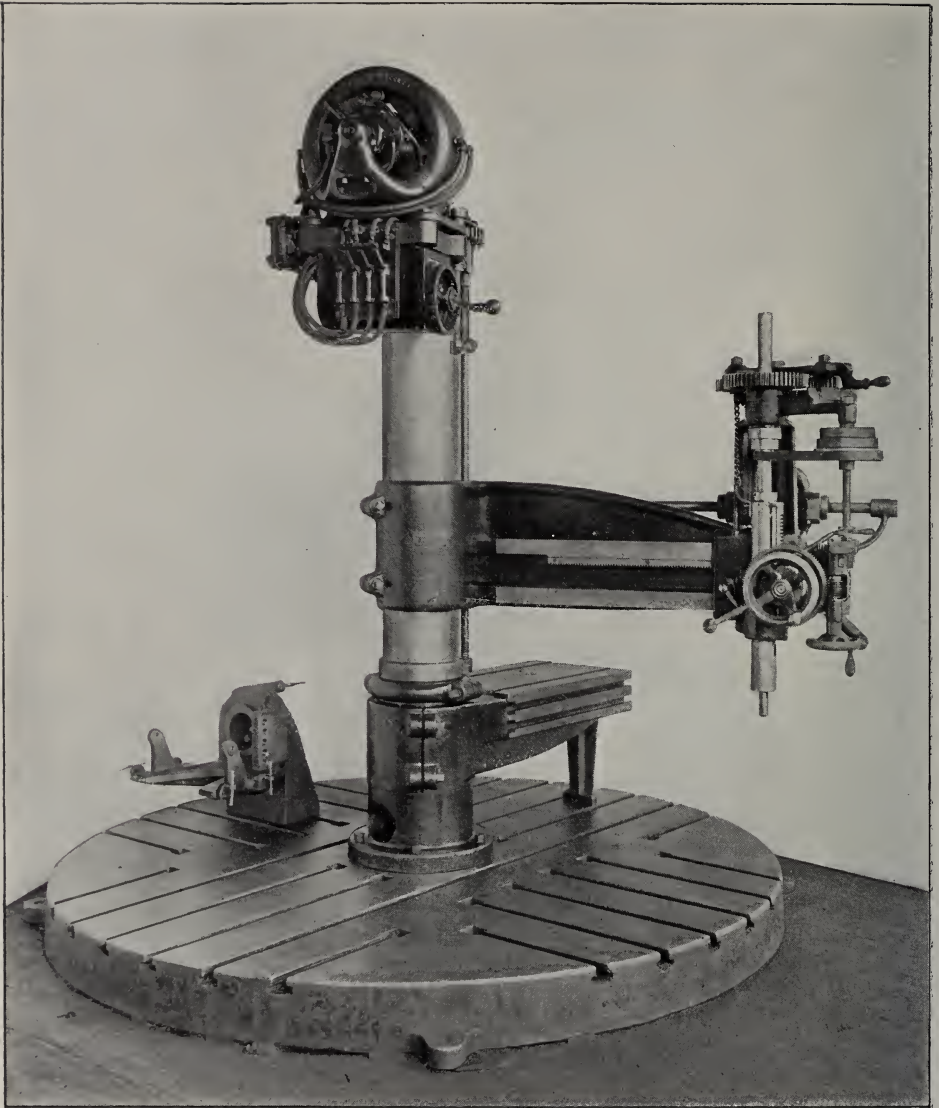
A CROCKER-WHEELER MOTOR, GEAR-CONNECTED TO A RADIAL DRILL PRESS, MADE BY THE PRENTISS TOOL & SUPPLY CO., NEW YORK
